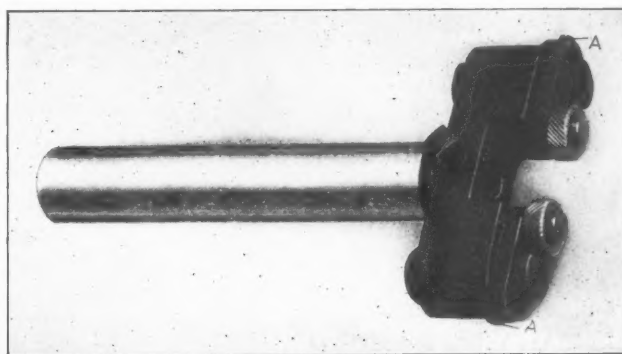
Adjustable Knurling Tool used in the Turret for Spiral or Diamond Knurling
